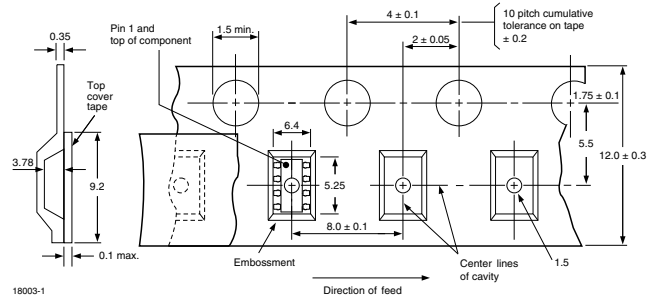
Tape Dimensions, 2000 Parts per Reel
